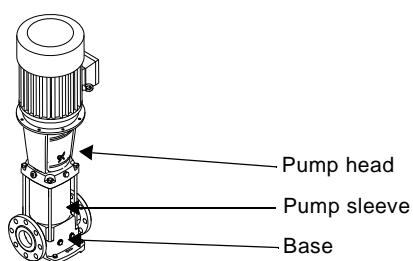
Hot surfaces on a CR, CRI, CRN pump
